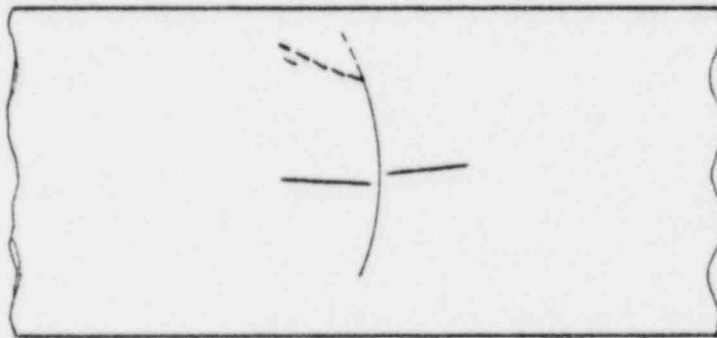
"A" SPARGER 8"-12" ON 270° SIDE OF HEADER
